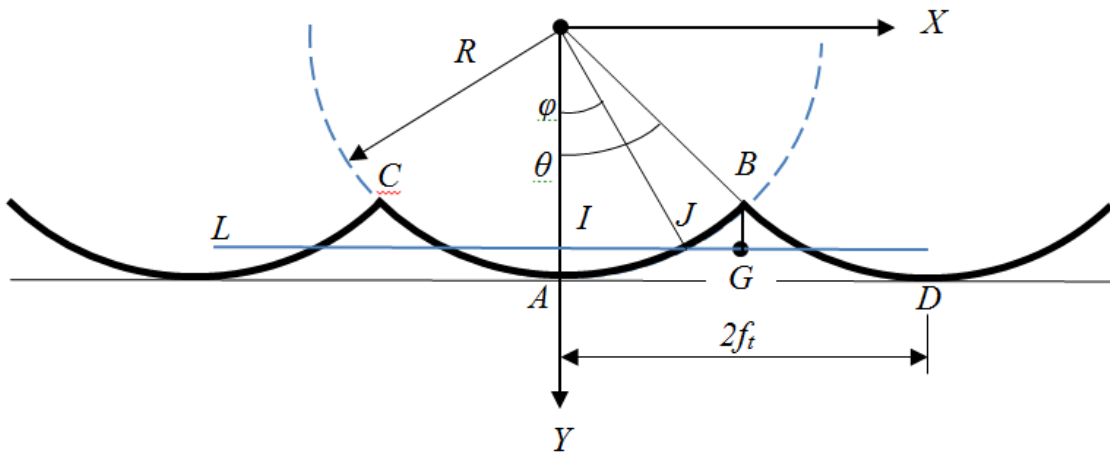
Surface Profile Formed by Ball End Mill at the Channel Bottom.
